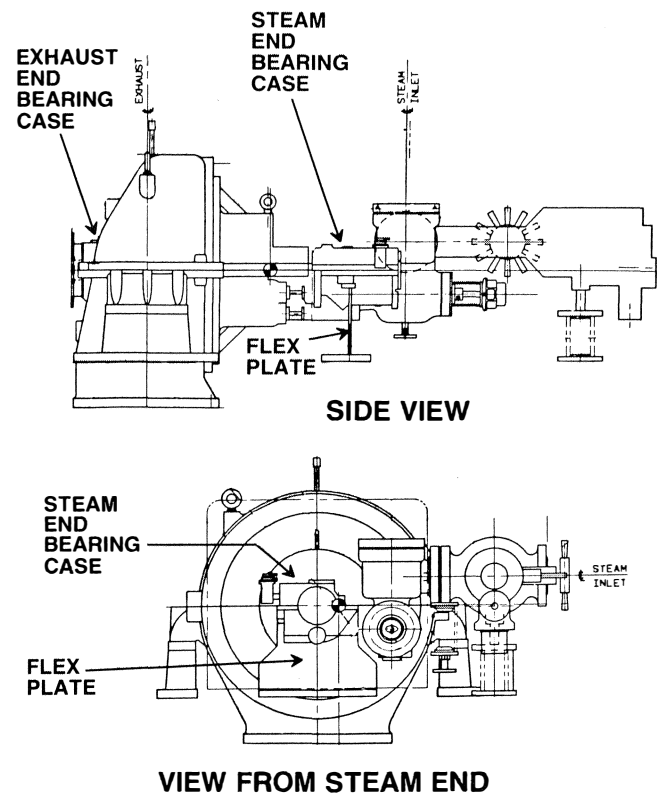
Steam Turbine Outline Drawing Showing Exhaust and Steam End Bearing Cases and Supports.
